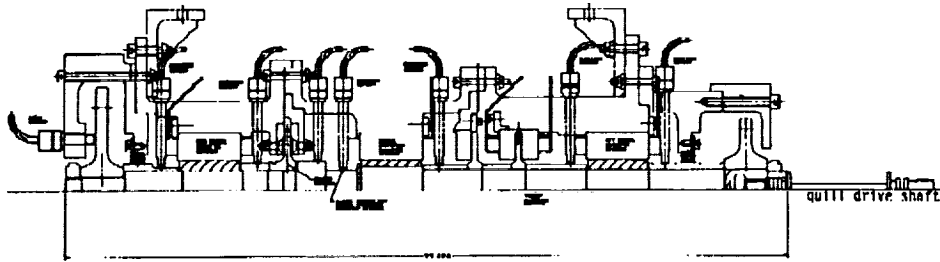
GE Single Spool Magnetic Bearing Test Rig
